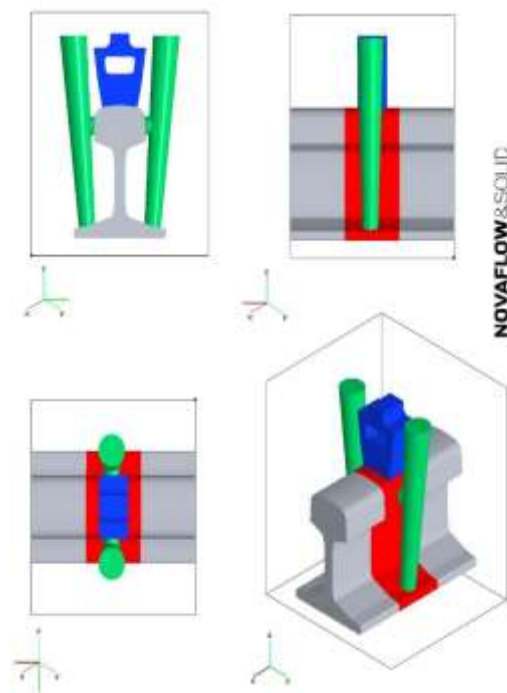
Metal casting without the sand mould, from the front, side, top, and angle perspective
